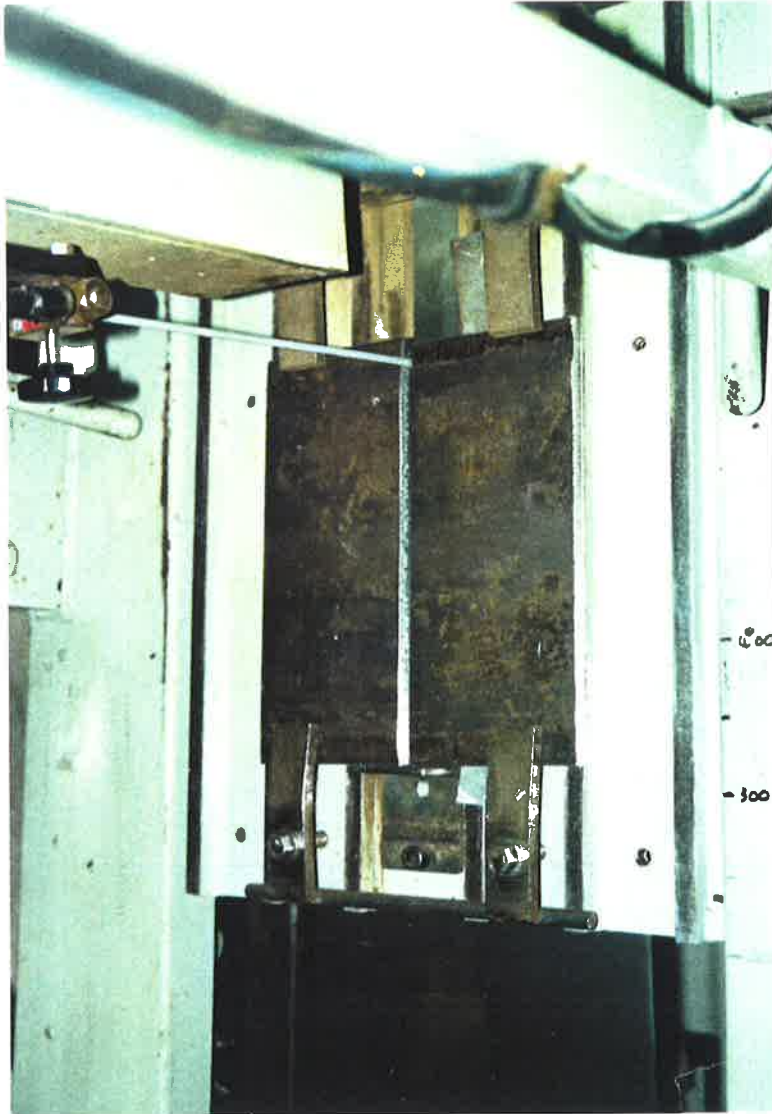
Photograph of work table showing the clamping arrangement and the position of the electrode inside the joint preparation prior to welding.
